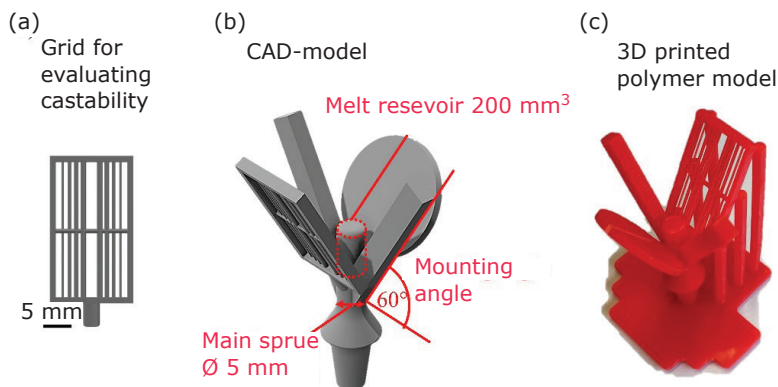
(a) Grid for evaluation of the form filling, (b) CAD model and (c) 3D printed polymer model made of castable resin used for precision casting
